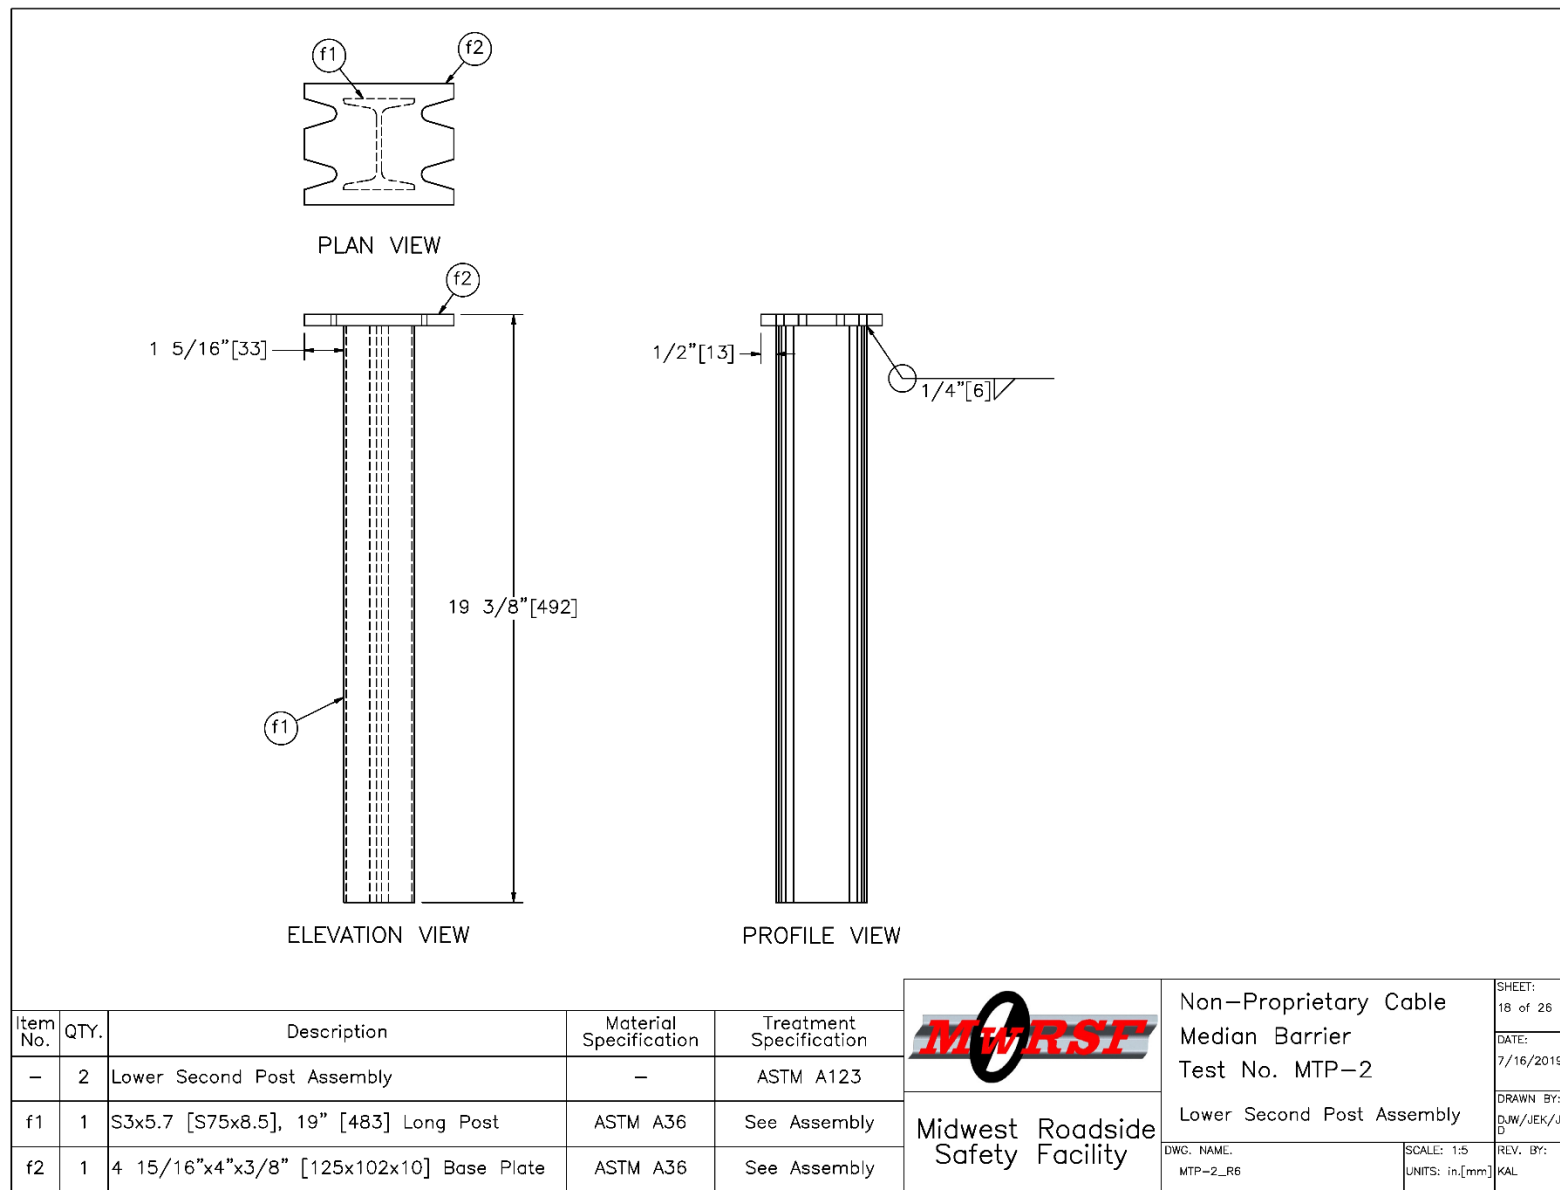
Lower Second Post Assembly, Test No. MTP-2
